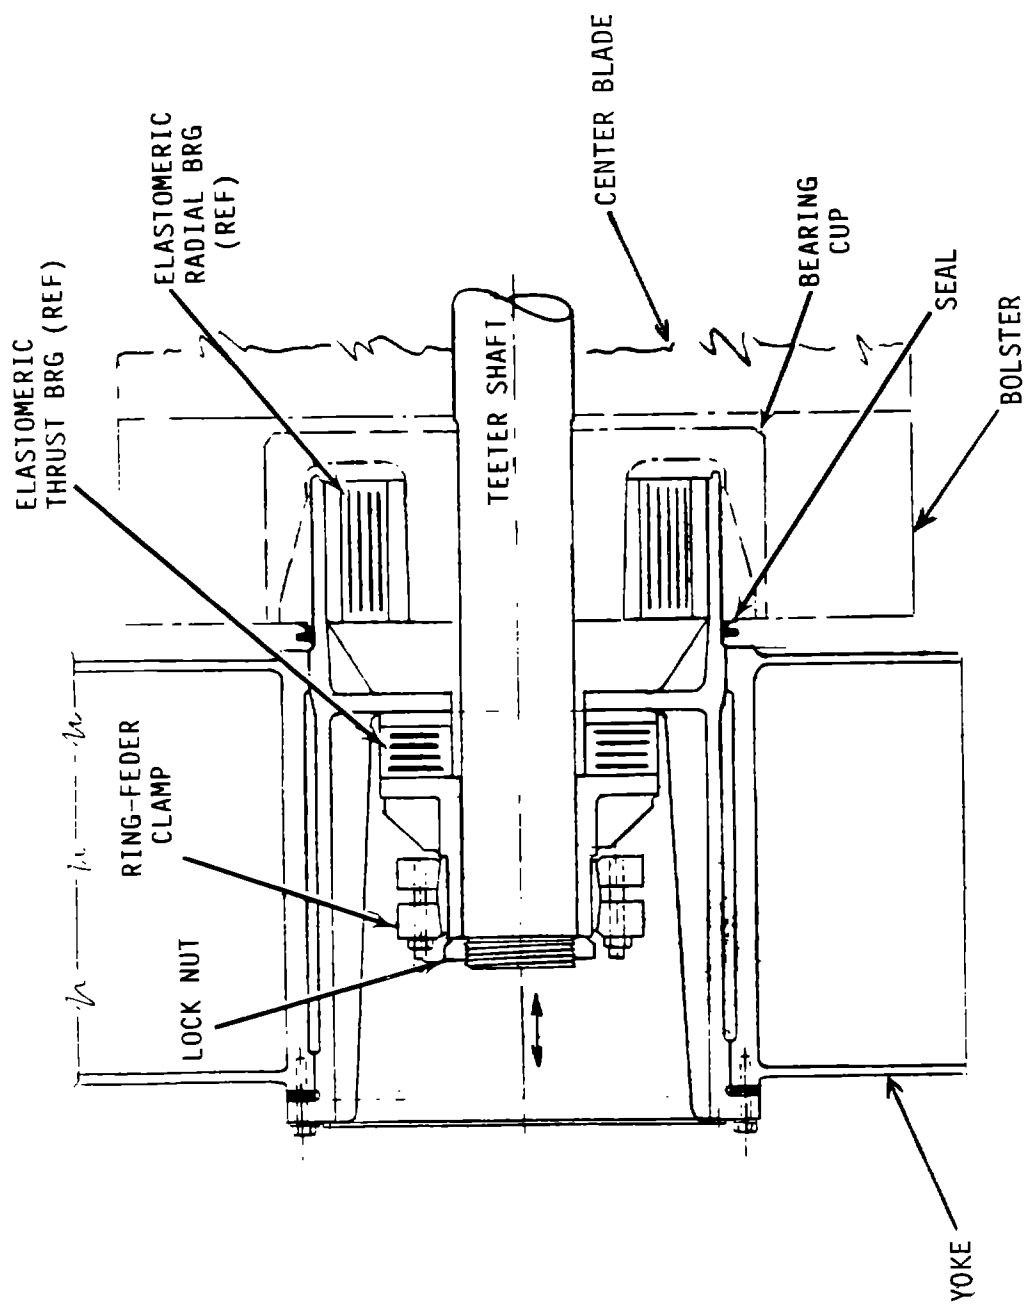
Radial and Thrust Bearing Interfaces with Blade
